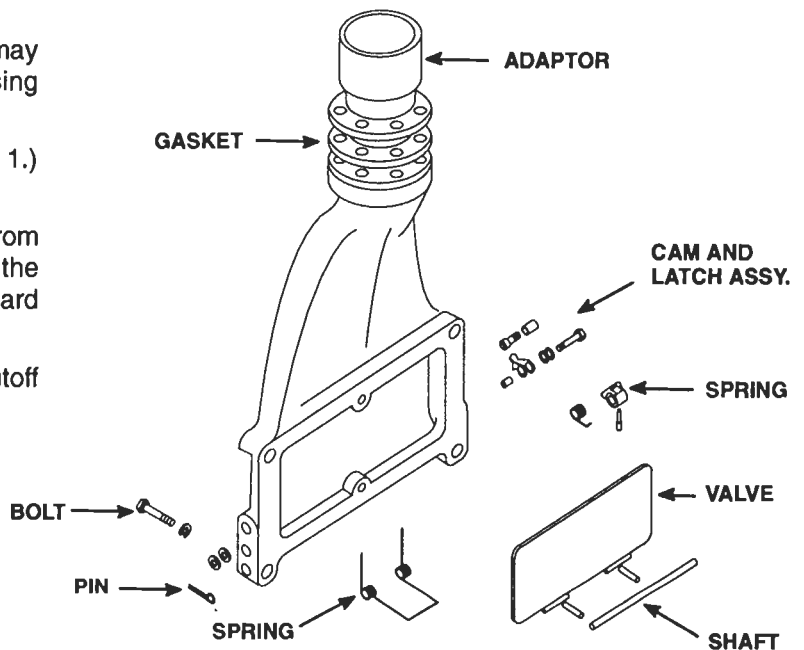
Cam and Latch Type Air Shutdown Housing Components
